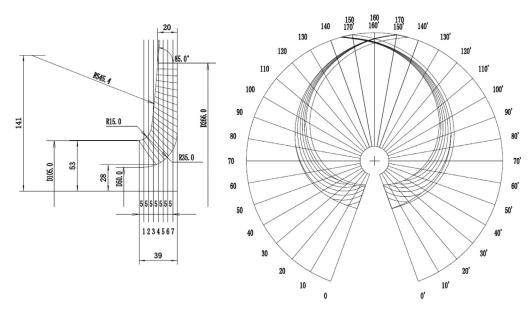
Impeller hydraulic design diagram of the D82-19-2 centrifugal mine pump.
